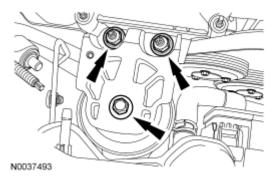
Locating Engine Mount Bracket Bolt And Nuts Courtesy of FORD MOTOR CO.
